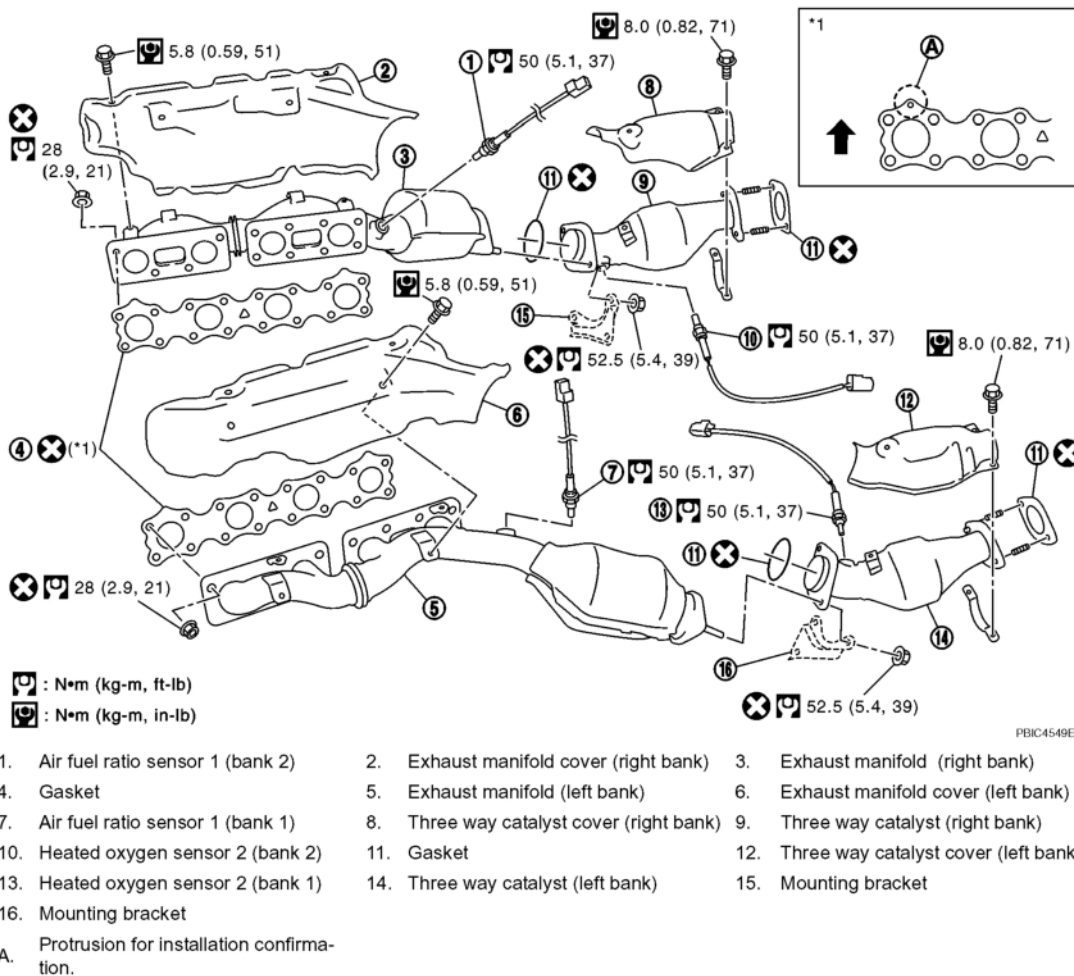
Identifying Exhaust Manifold And Three Way Catalyst Components With Torque Specifications
